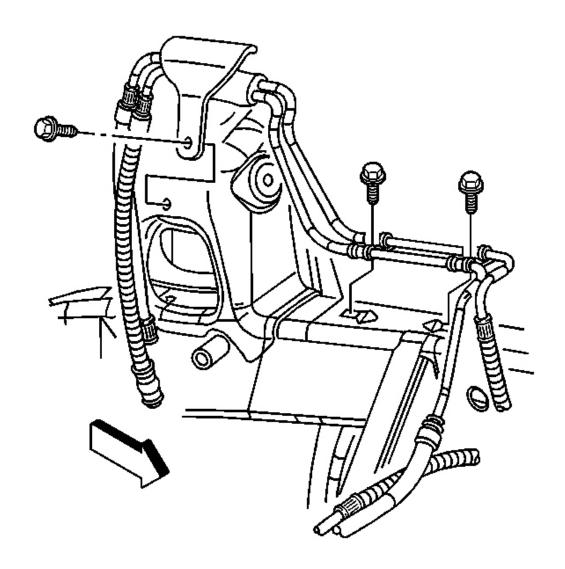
Removing/Installing Power Steering Hose Assembly From Bracket At Wheel Well
